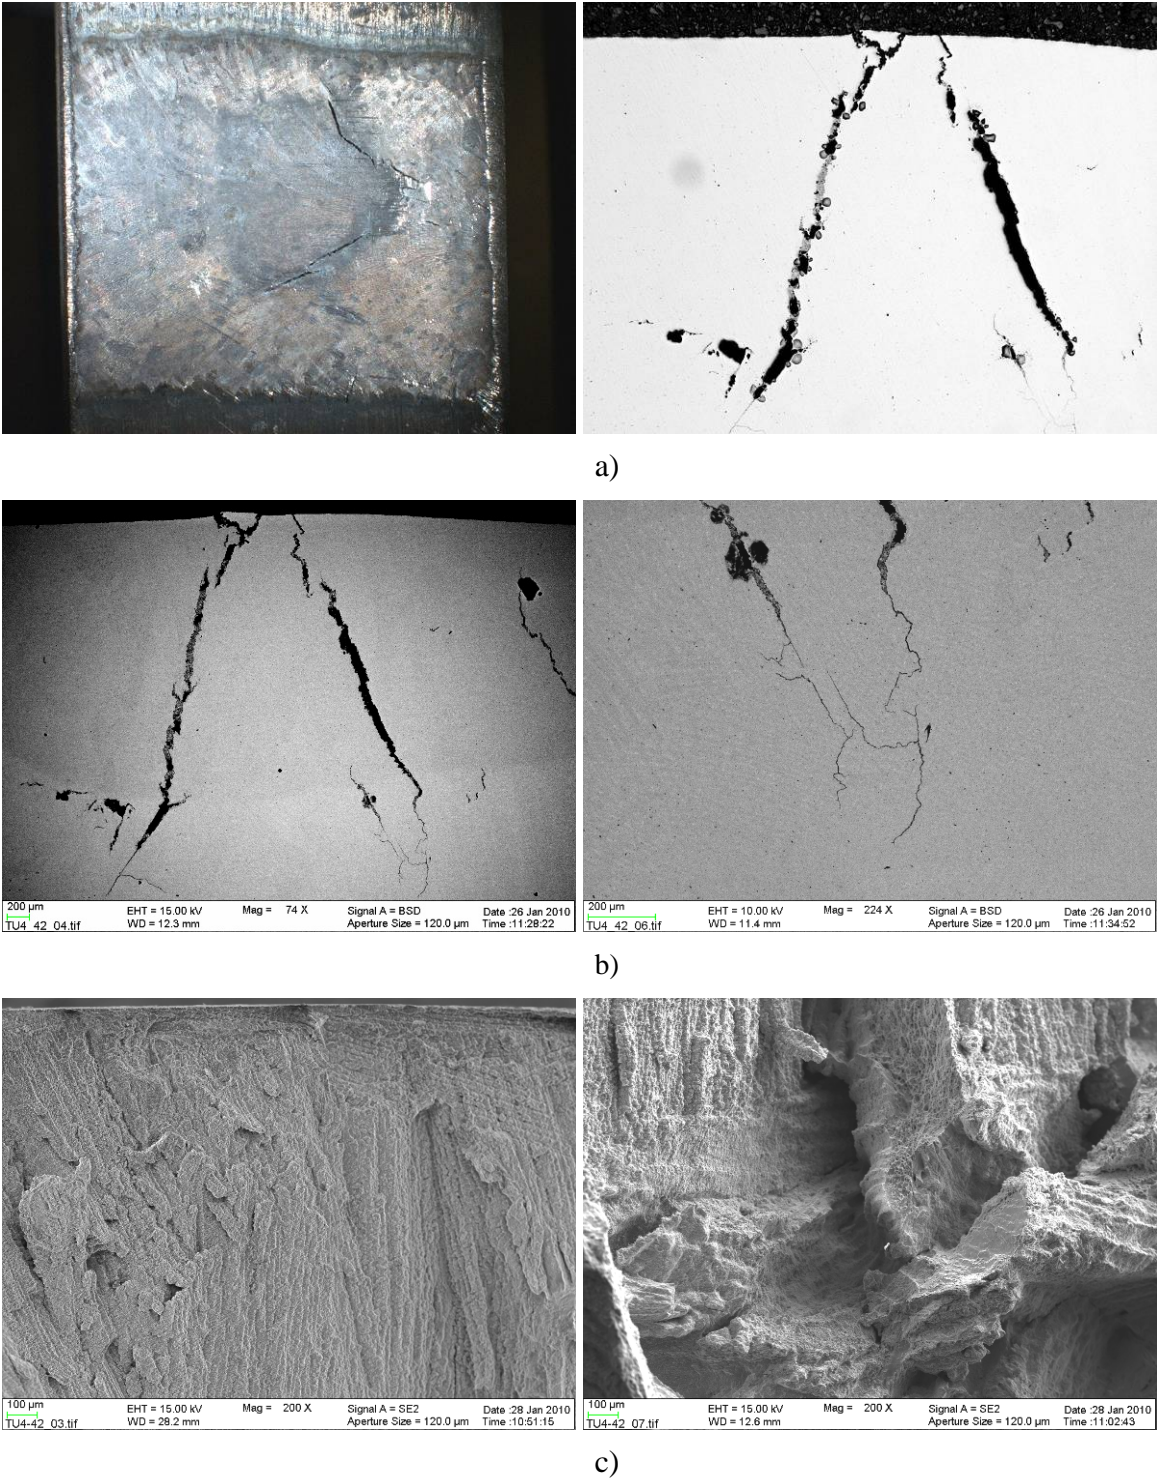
Mock-up TV Alloy 182 weld (specimen No. 42) after hot cracking in Varestraint test and after 2178 h testing in doped steam. a) Outer surface and cross-sections of the main hot cracks. b) Cross-sections of the hot cracks and liquation cracking below the weld bead. c) Fracture surface of the opened hot crack.
